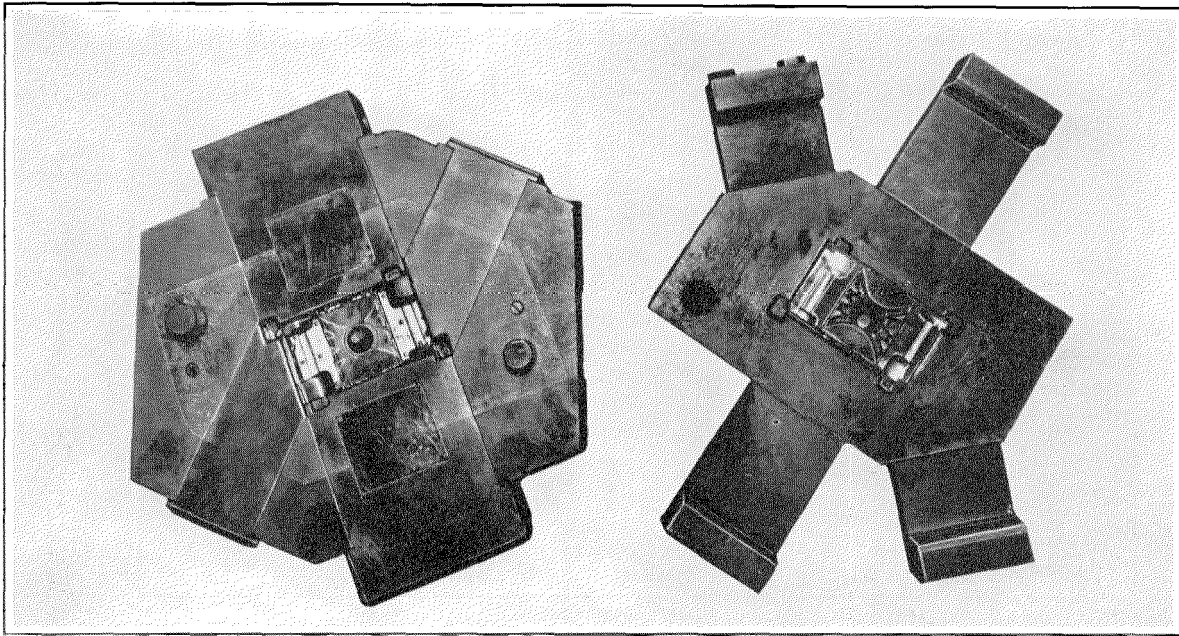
Mould for Brush Carriage shown in Fig. 5.
